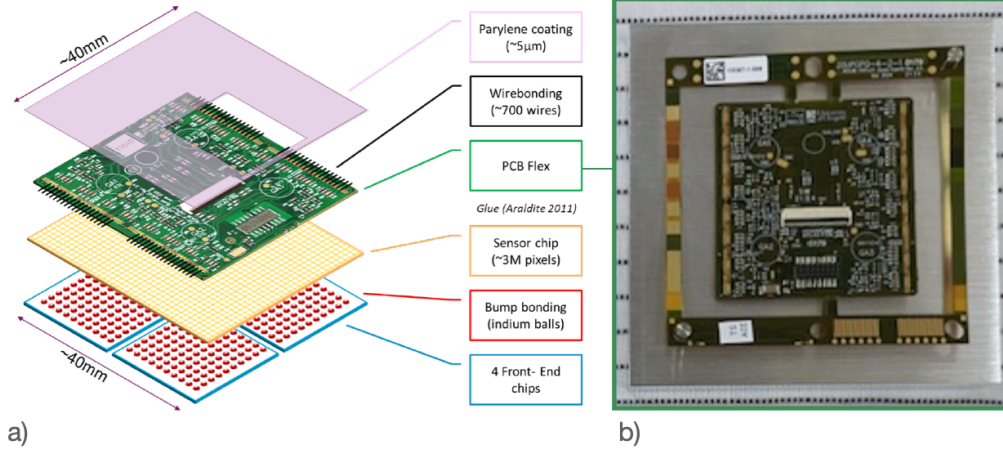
a) Assembly of an ATLAS ITk pixel module. b) Detail of the flex PCB.
